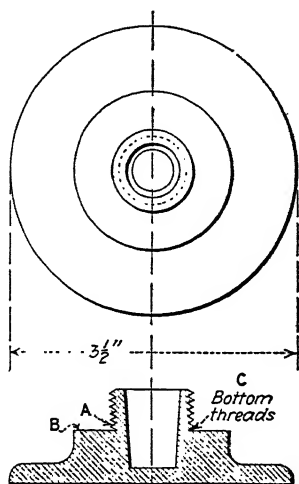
A Difficult Piece of Threaded Work, Changed to Assist in Production
